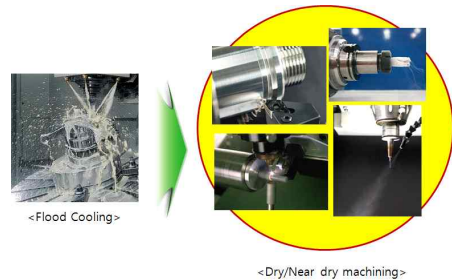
Transition of wet machining to dry/near machining for Eco-friendly machining
